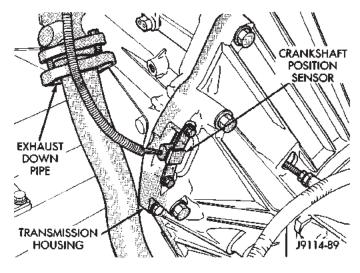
Crankshaft Position Sensor—2.5L Engine
